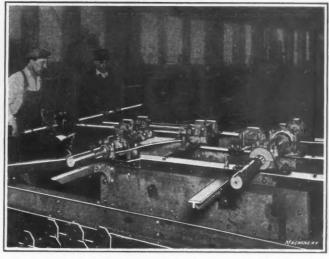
Power Reamer for reaming Bearings on 75-horsepower Tractor
